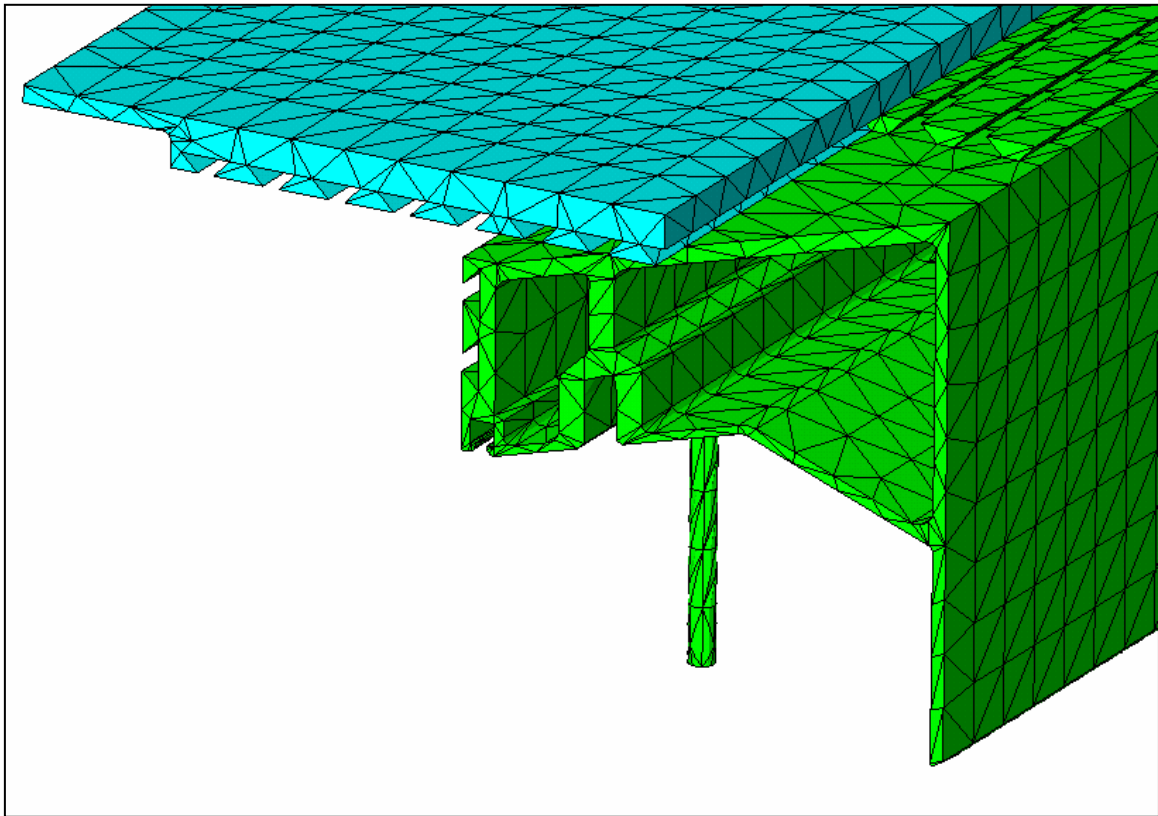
Mesh shown for dovetail support, flange and bolts.
